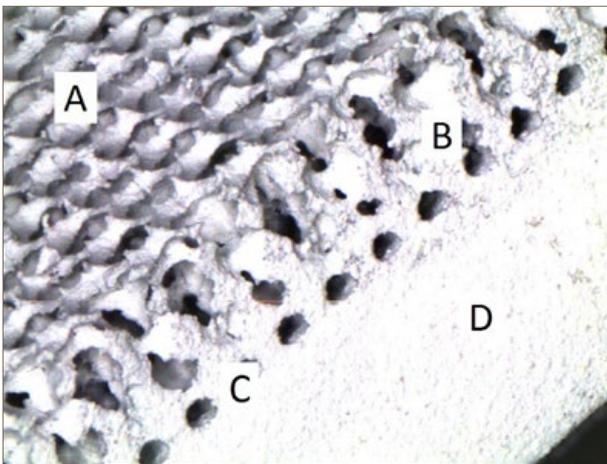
Cross-section of a titanium integration surface manufactured using the 3DT technology
